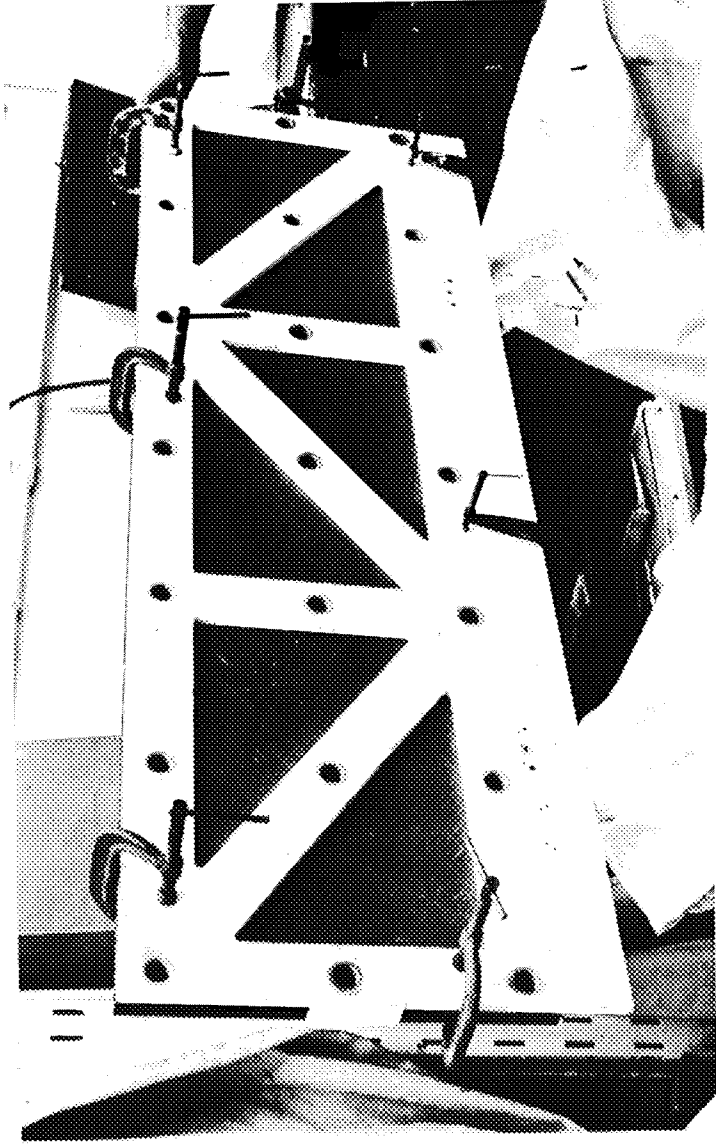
SUPPORT PANEL DRILL TEMPLATE
